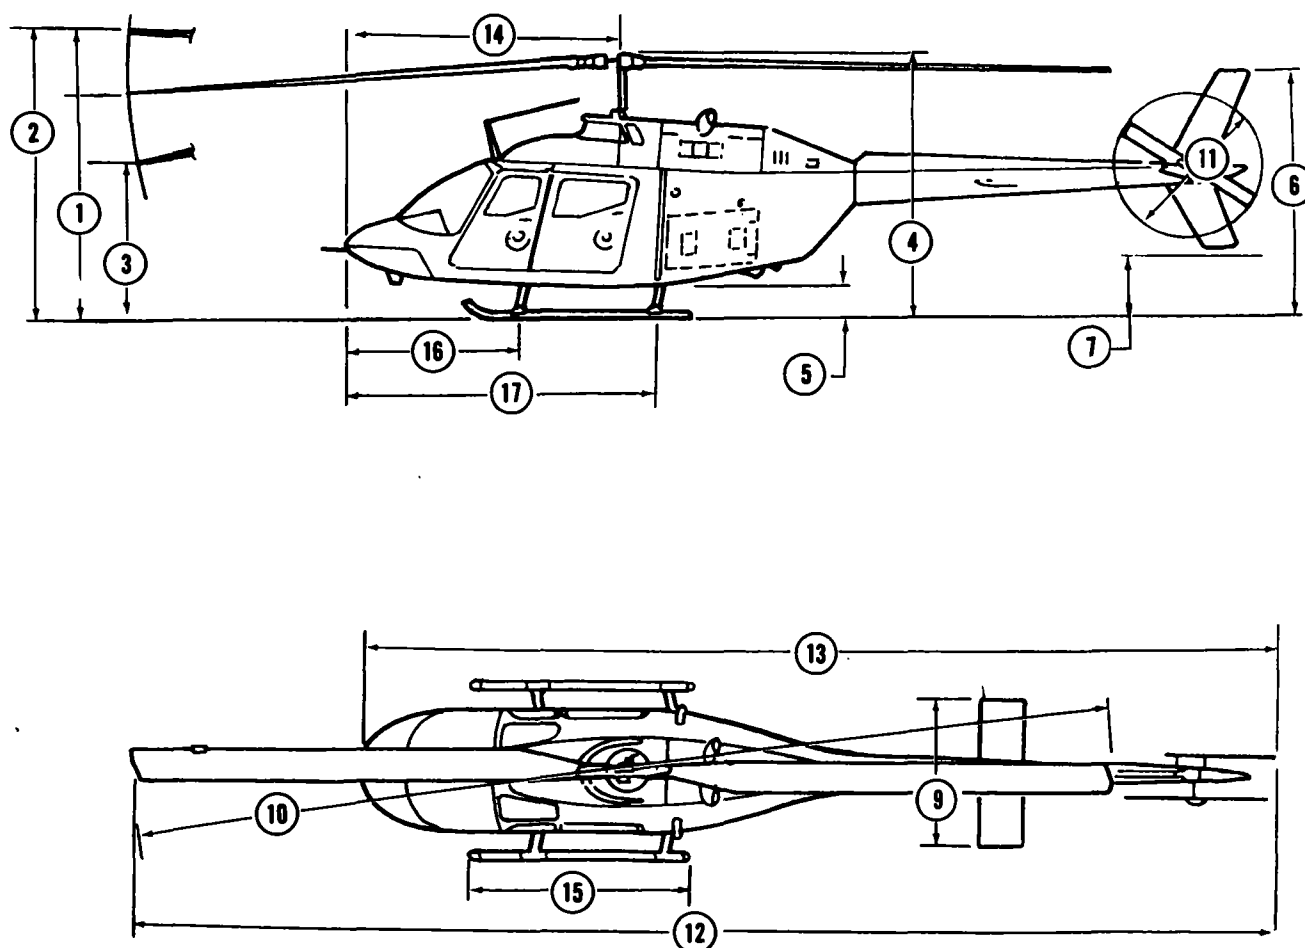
Principal Dimensions, OH-58A (Kiowa) (Sheet 1 of 2)
